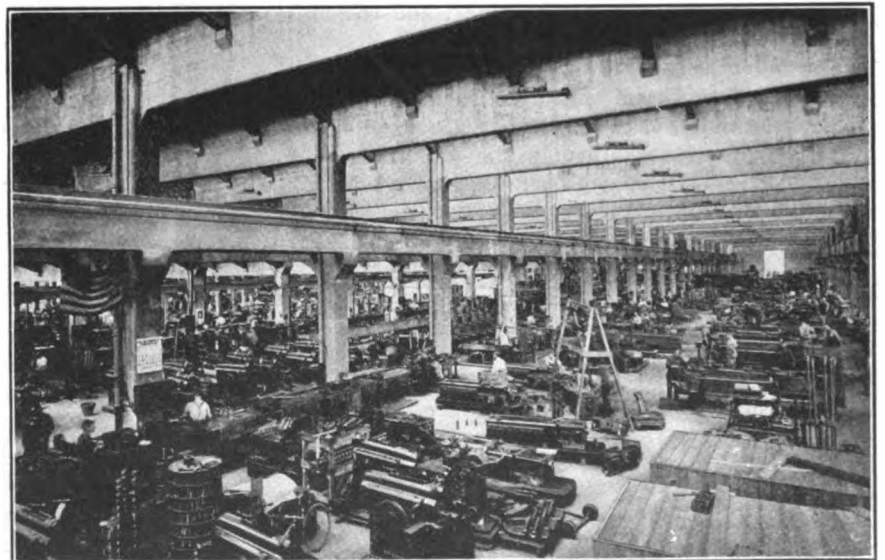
GENERAL VIEW OF ASSEMBLING DEPARTMENT SHOWING THE HIGH BAYS. NOTE REINFORCED CONCRETE CRANE RUNWAY
